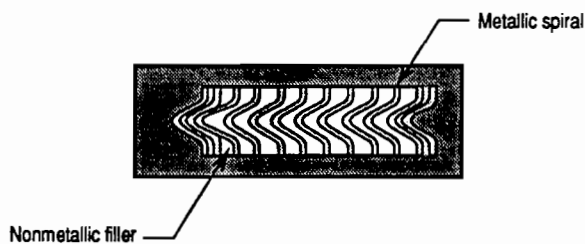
Cross Section of Spiral-Wound Pump Head Gasket.
